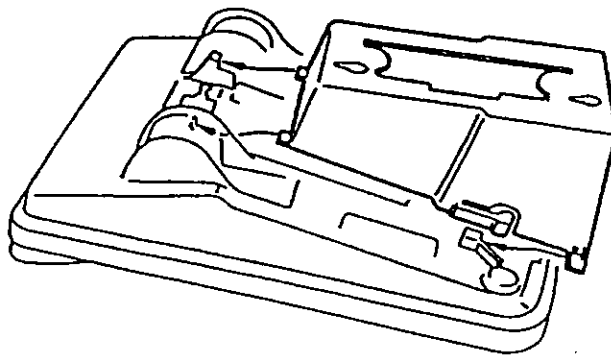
Mounting the Multiline Terminal to the WMU-W (GG) Unit
